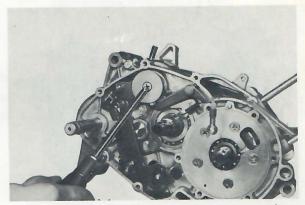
Loosening gear shifting cam pin retainer fitting screw
